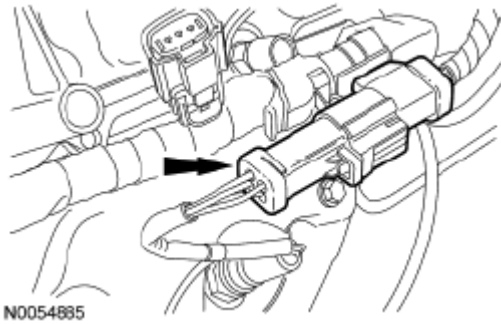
Locating LH Heated Oxygen Sensor (HO2S) Electrical Connector
